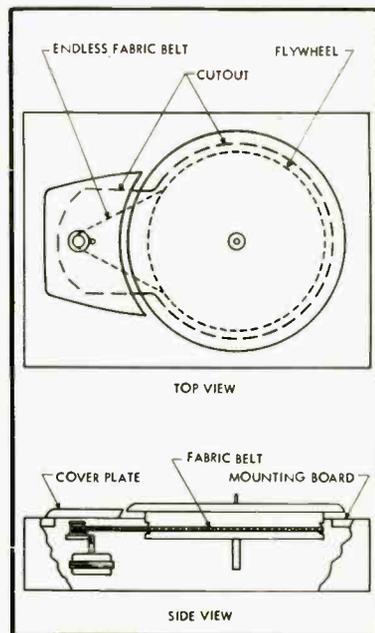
Plan and side elevation of over-all arrangement of turntable.
